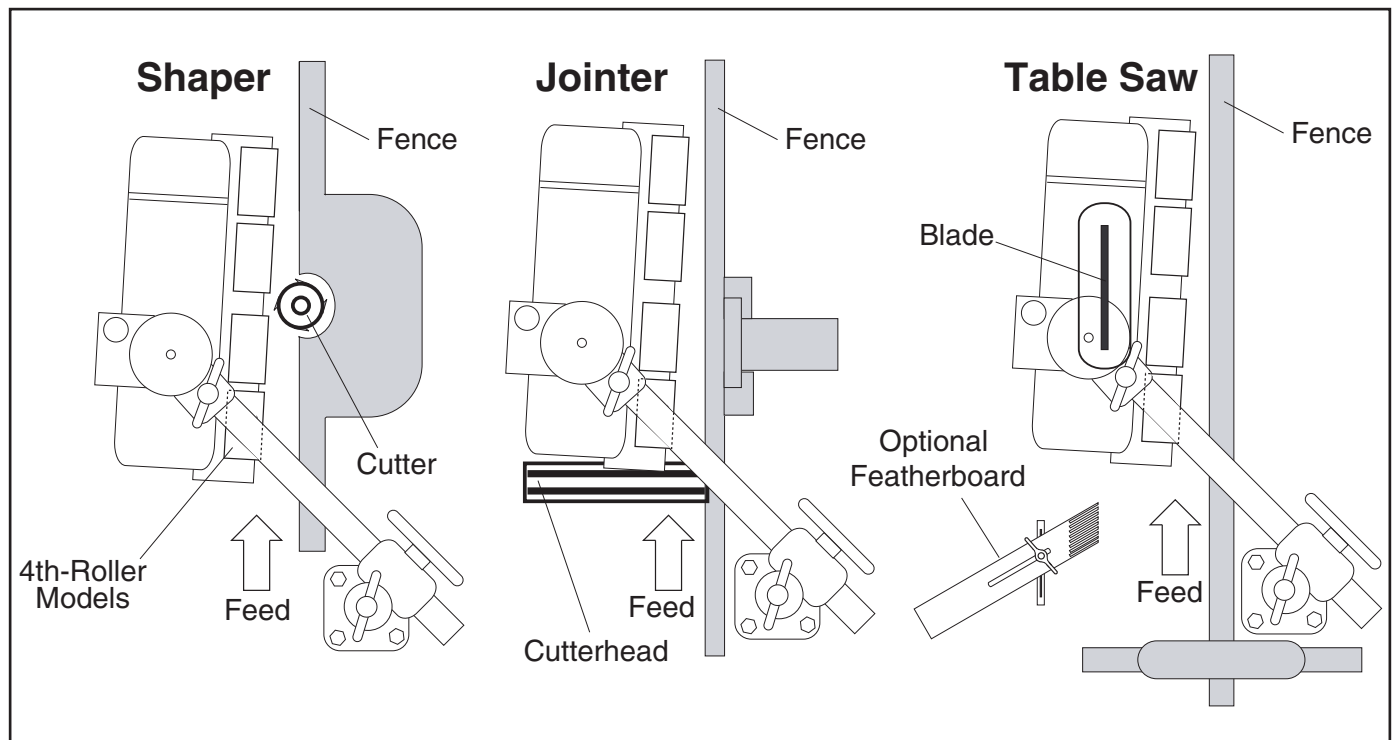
Typical power feed mounting on a shaper, jointer, and table saw.
